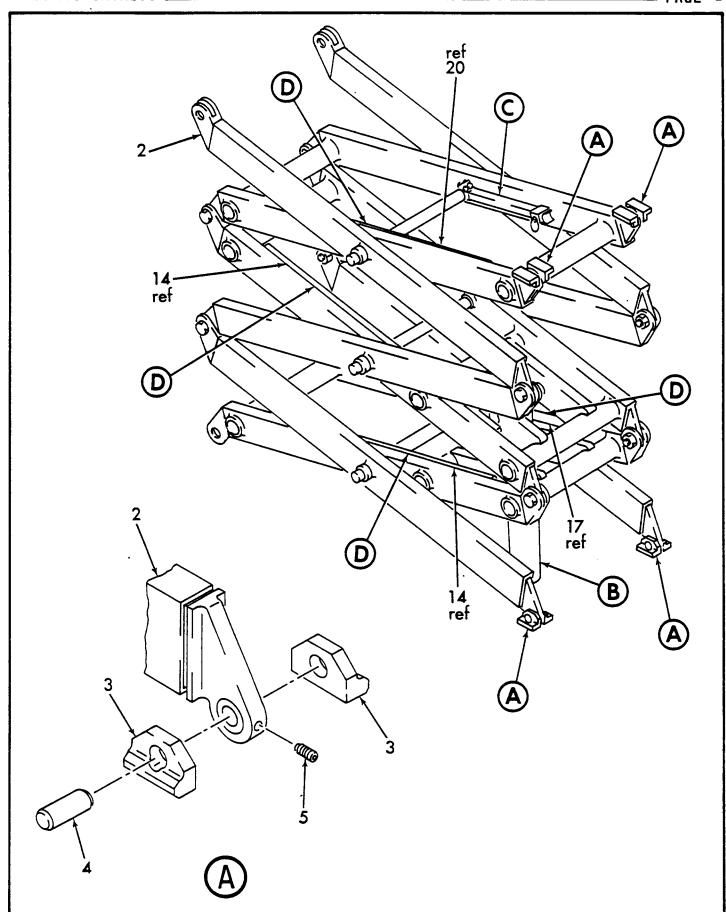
A M-15 LIFT CYLINDER ASSEMBLY
